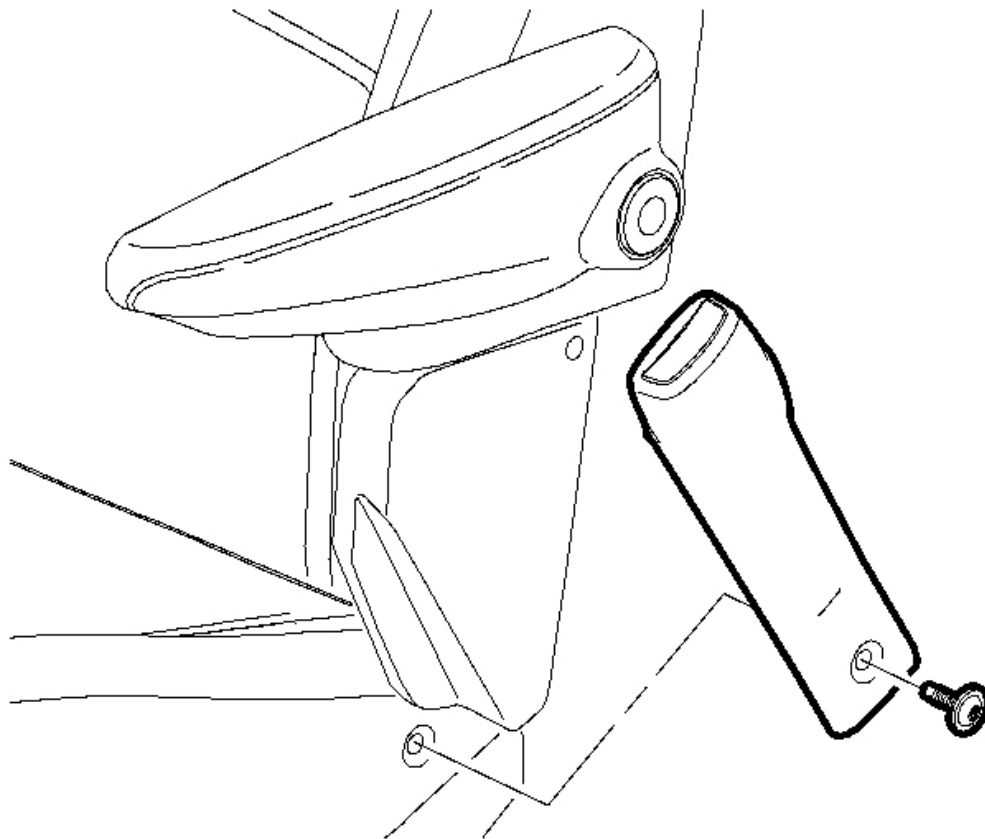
Removing/Installing Bolt To The Seat Belt Buckle
